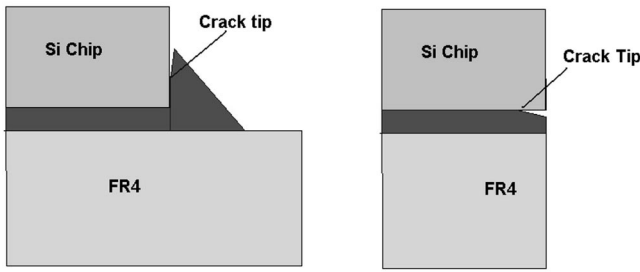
Schematic showing location of: (a) vertical fillet edge crack and (b) horizontal crack underneath chip.
